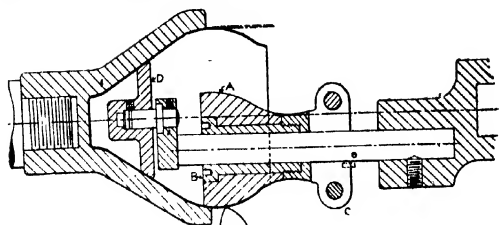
COMBINED PRESSURE PALLET AND FORMING ROLLER MANIPULATED FROM LOOSE HEAD
